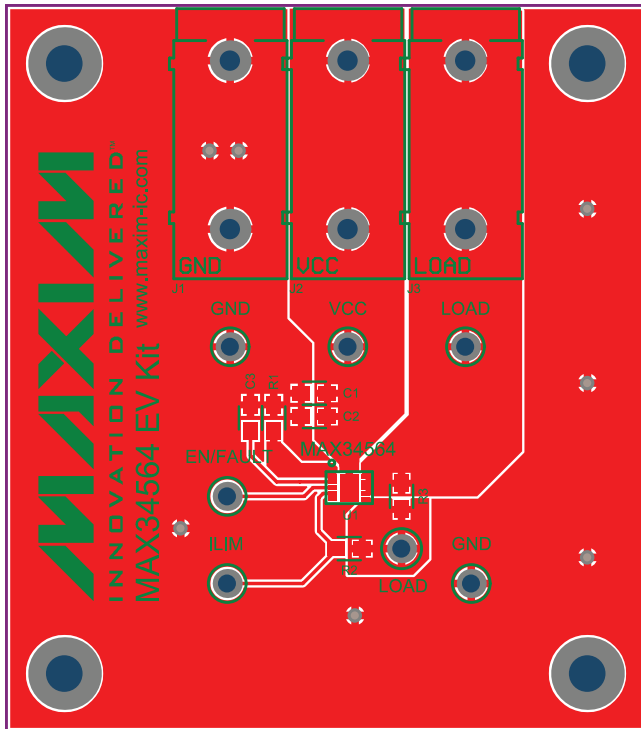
MAX34564/MAX34565 EV Kit PCB Top
